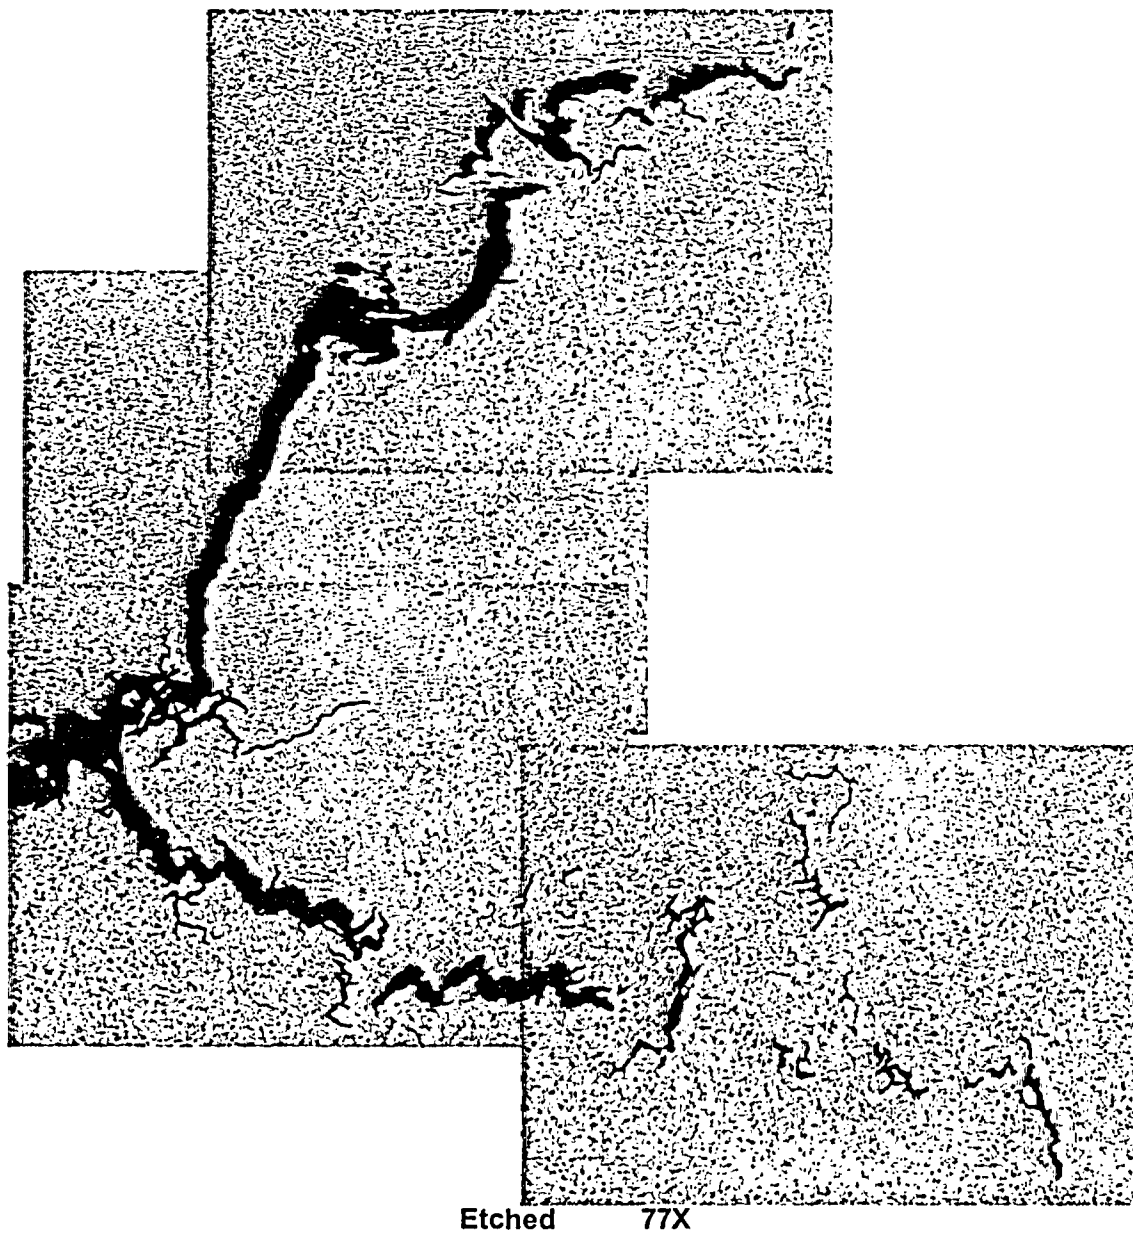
Crack tips toward the J-groove weld O.D.
